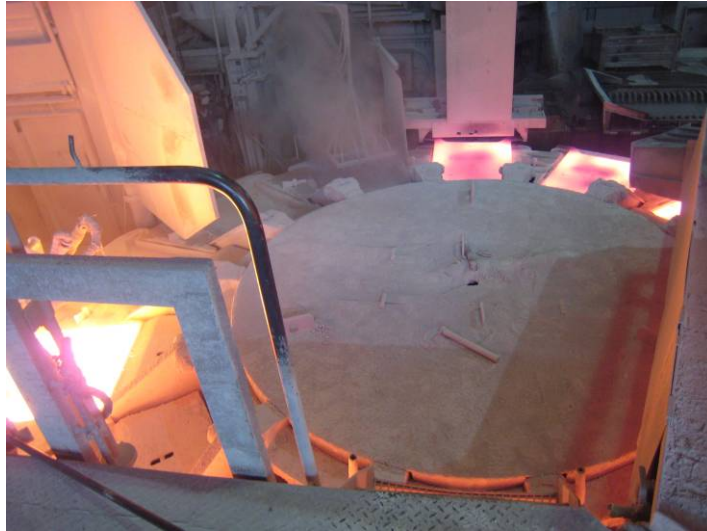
Casting wheel at Montanwerke Brixlegg AG
